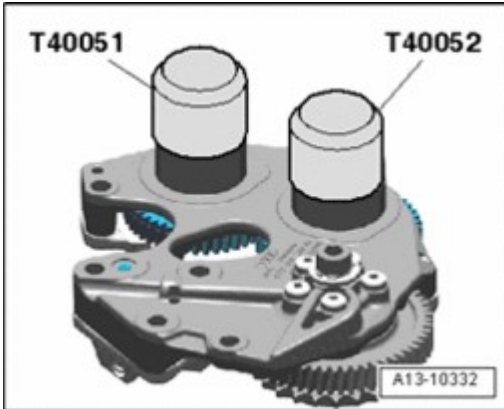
Driving In Sealing Ring For A/C Compressor Drive Using Thrust Piece T40051 & Sealing Ring For Power-Steering Pump Drive Using Thrust Piece T40052
